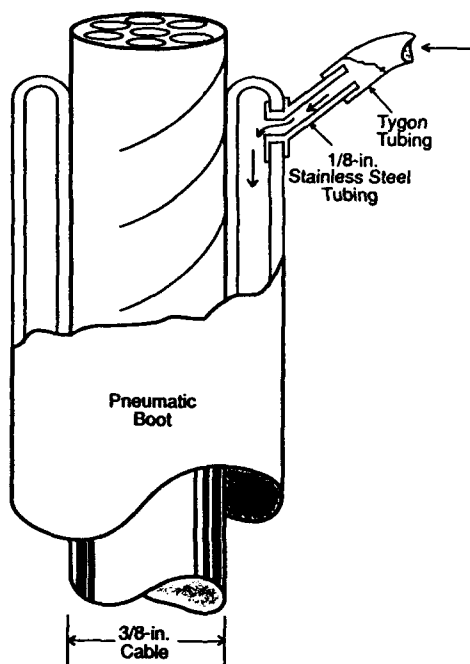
Cut away drawing of boot encasing the guy wire (1 in. = 25.4 mm).
